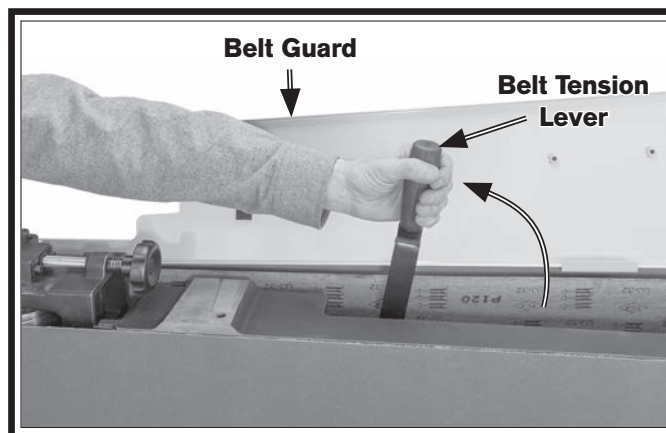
Belt guard open and belt tension lever moved up toward idler roller.
